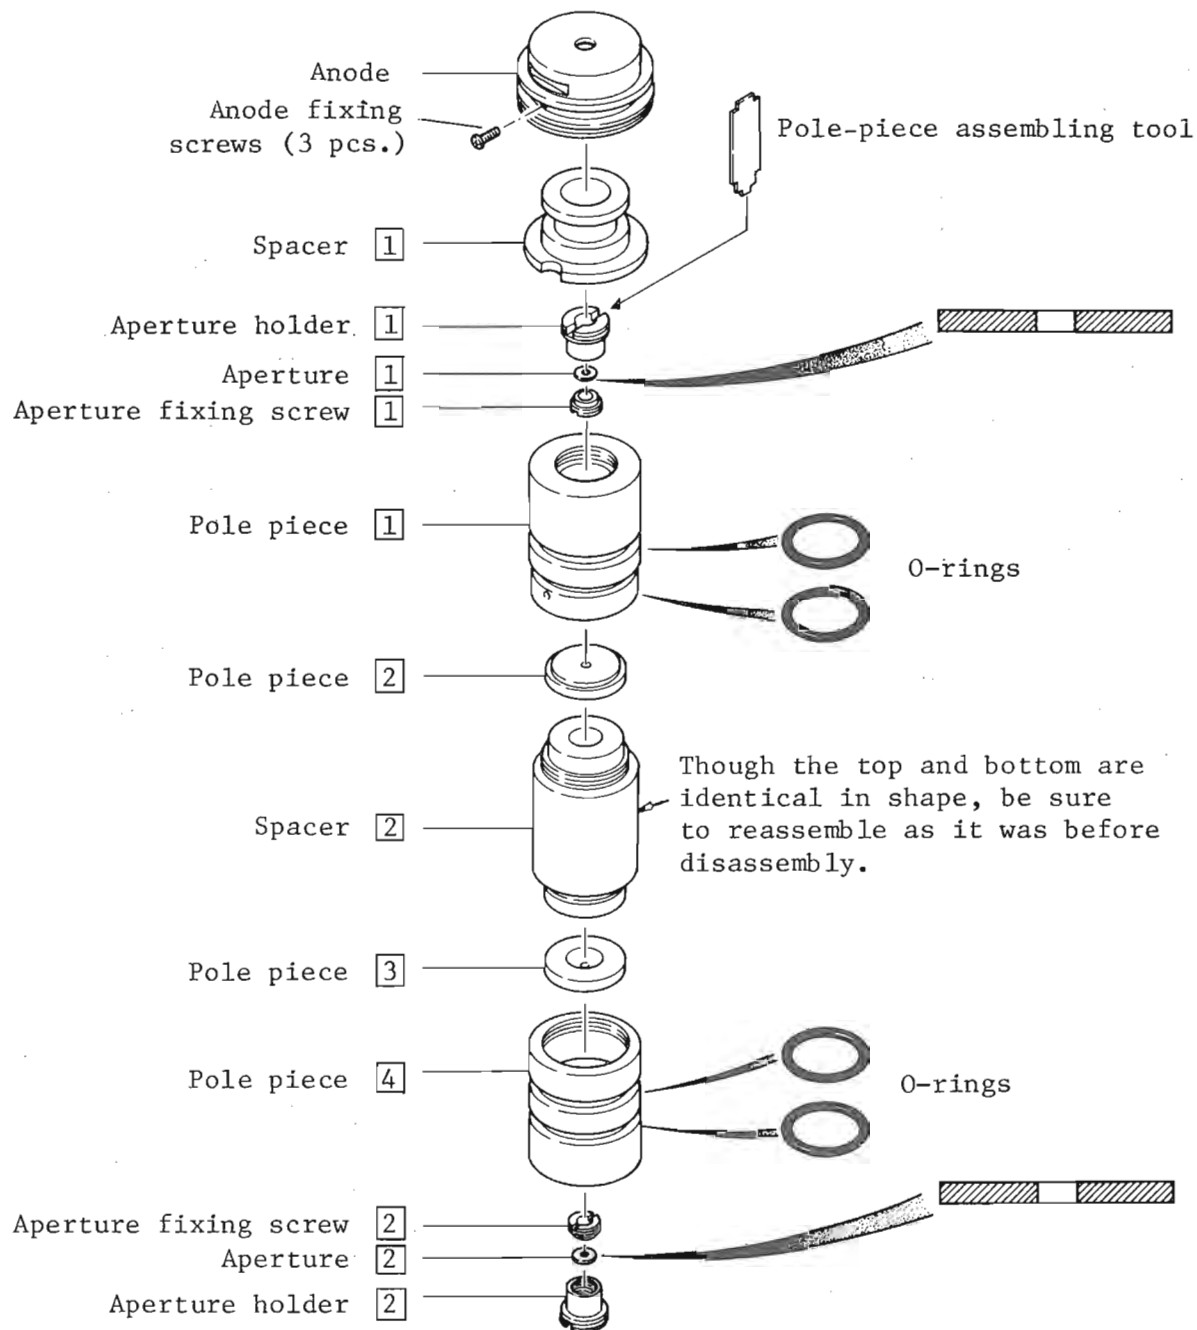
Disassembling the condenser lens pole-piece assembly
